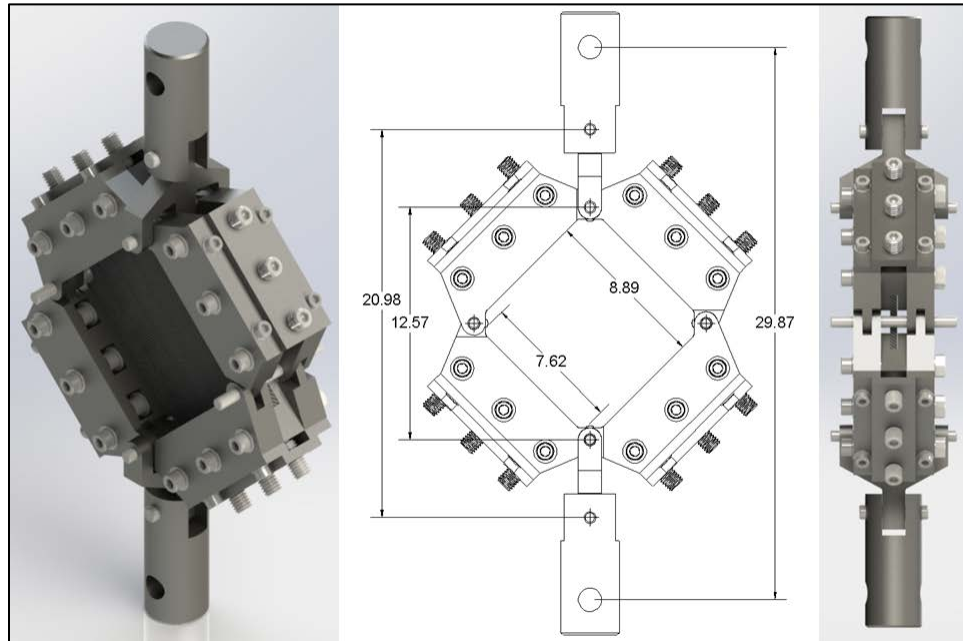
Final Combined Loading PFS fixture design (dimensions in cm).
